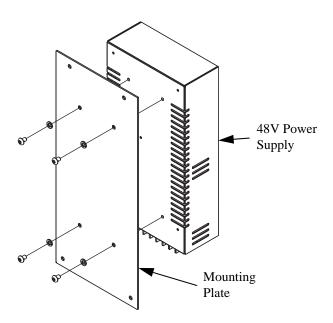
Removing the Mounting Plate from the 48V Power Supply
